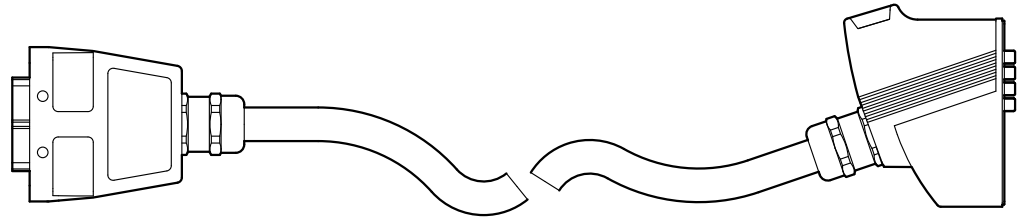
Brakemotor cable with motor protection; IS and PLUSCON VC
